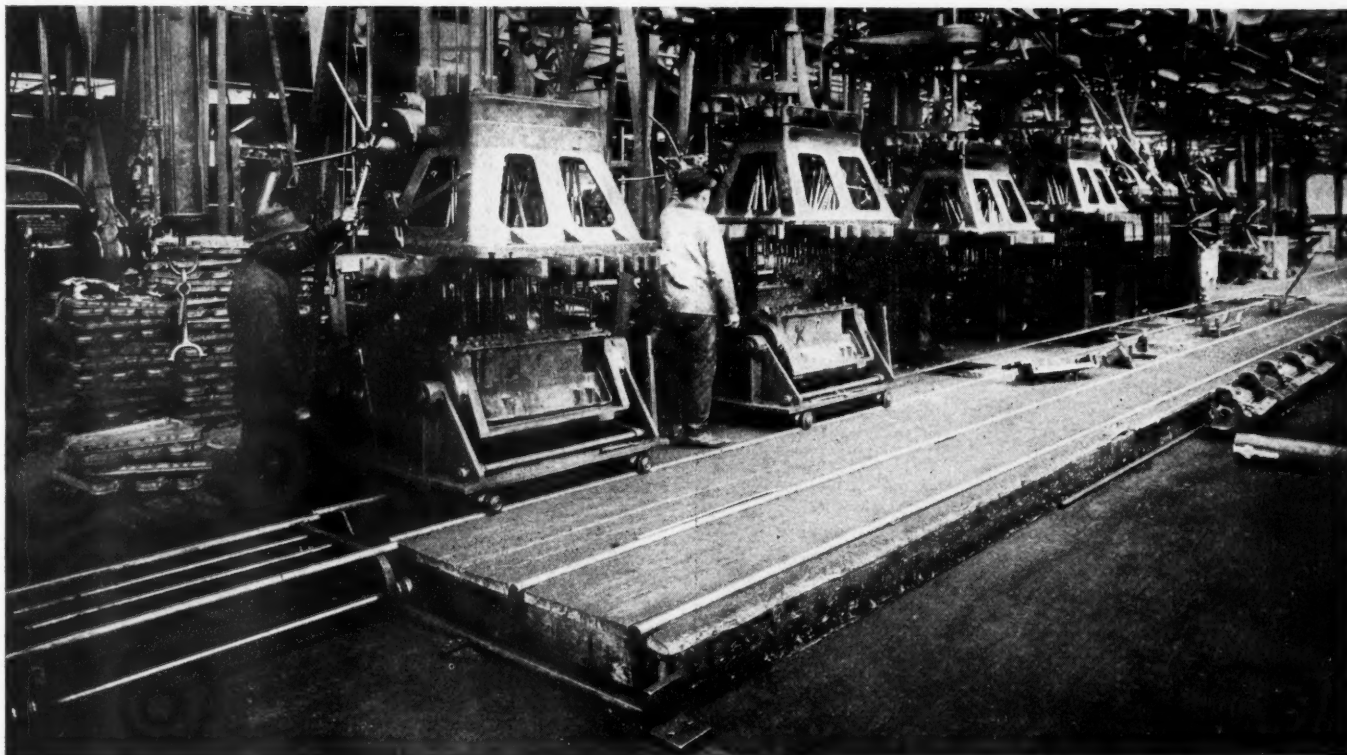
Railroad fixture for drilling and reaming holes in cylinder block for valve stem and push rod guides. This set-up also takes care of valve seats and all holes and machine work related to the valve mechanism
